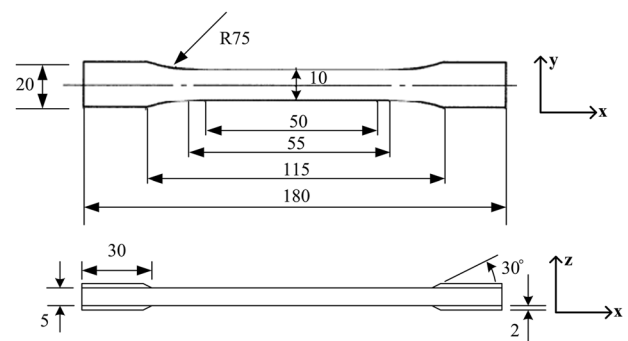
The configuration of the tensile test specimen (dimensions in millimeters).
